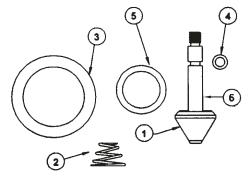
Wet Valve Seal Rebuilding Kit (P/N 550698).
